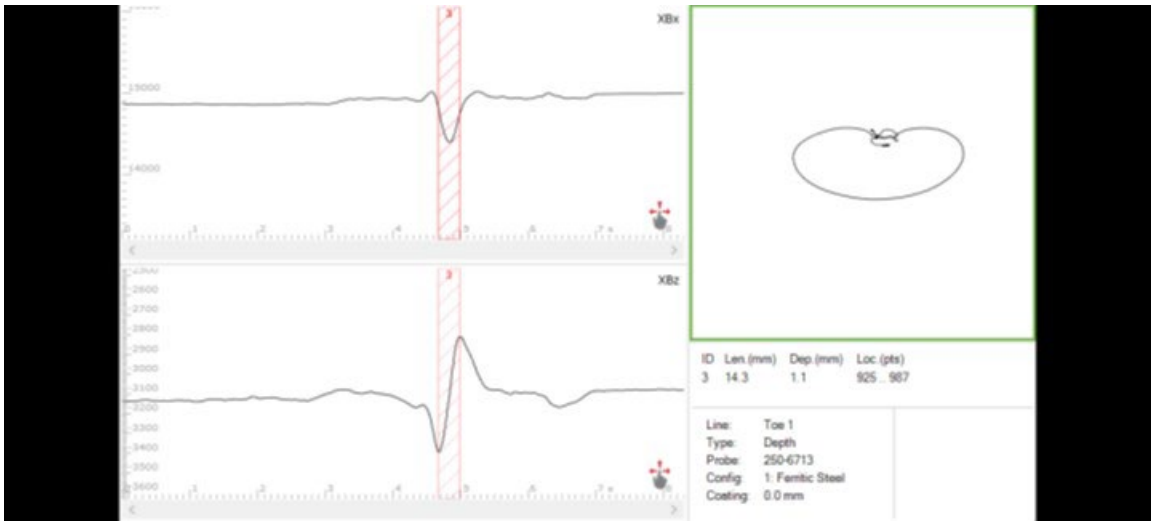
ACFM scan data of Flaw 1 for butt weld MG-13 panel
